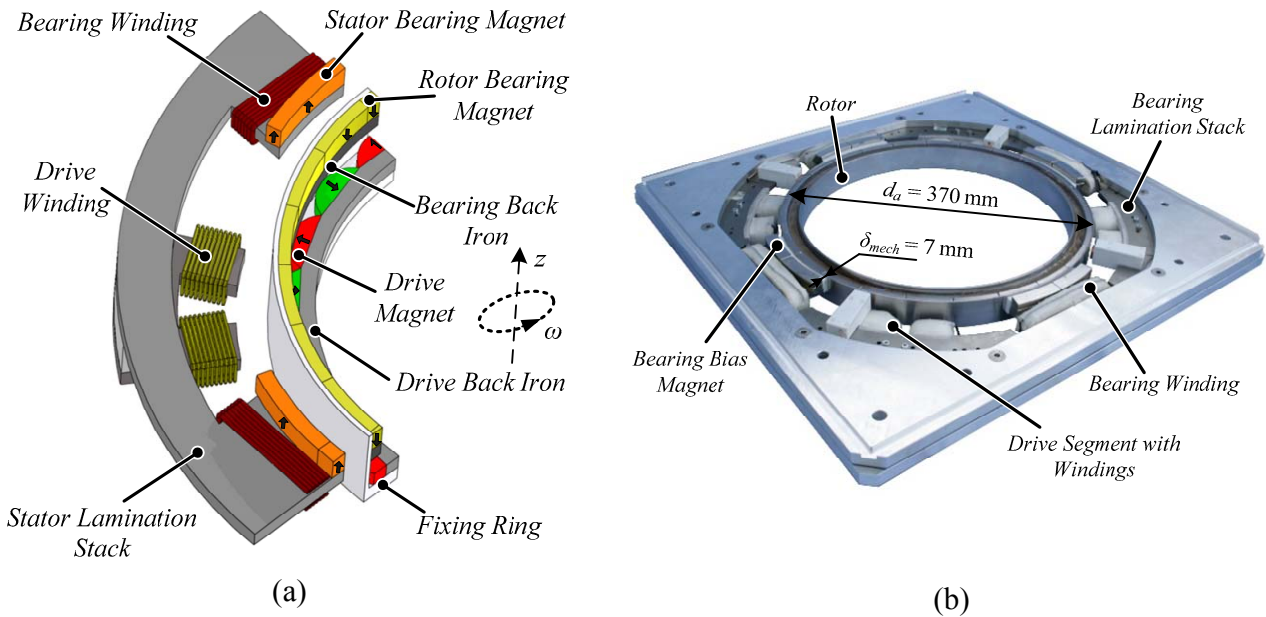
(a) Schematic cut view through the Magnetically Levitated Two-level Motor (M2M) and (b) picture of the laboratory prototype.
